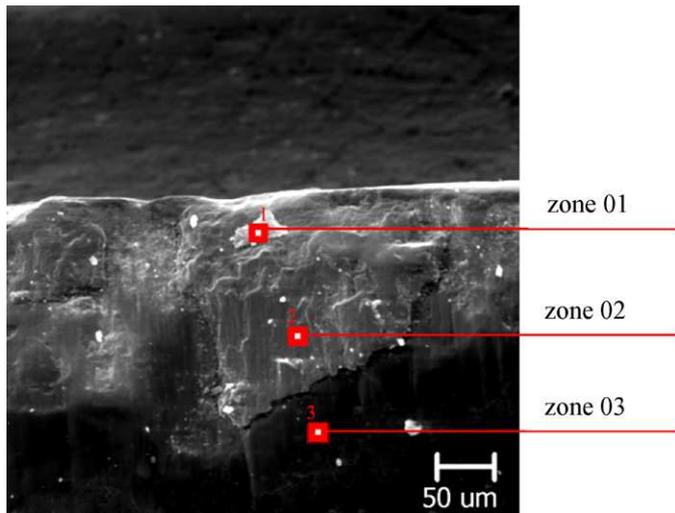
Tool cutting edge after machining material A at cutting speed of 800 m/min.
